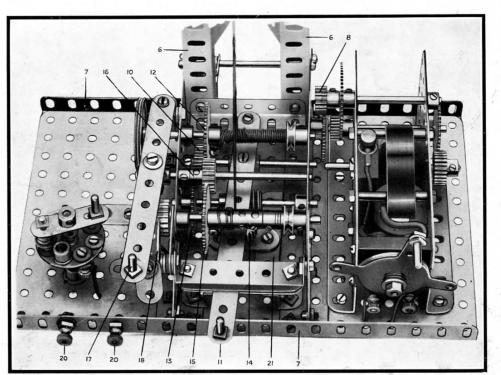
Partial plan view of Gear Box, showing layout of Gears, Electric Motor, Operating Levers, Brakes, Controller, etc.
